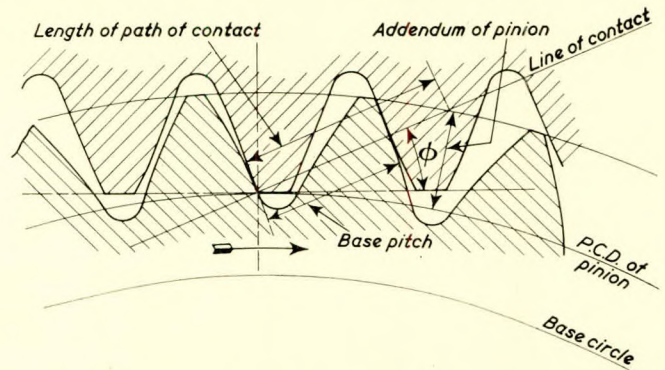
7/12-in. × 22½-deg. A.A. tooth form; 30-tooth pinion meshing with a rack
